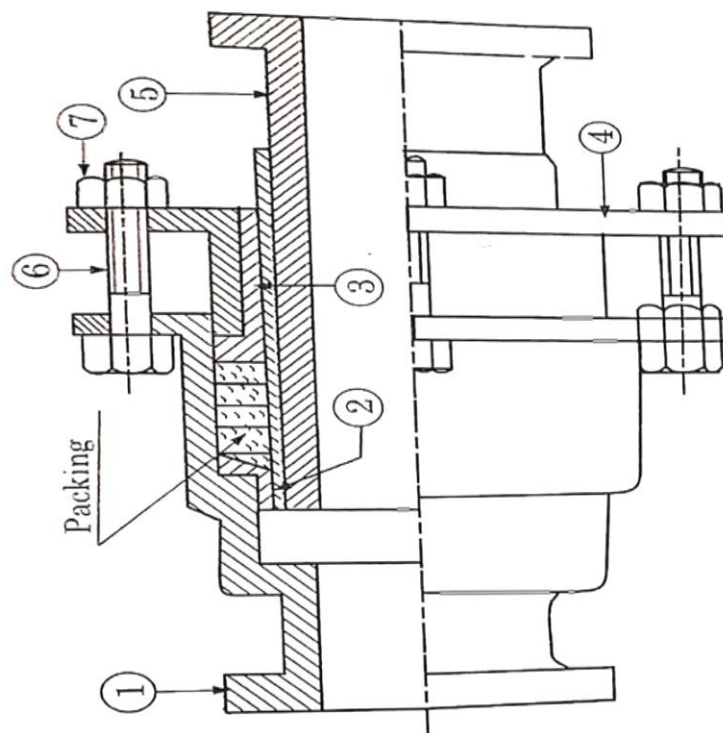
(a) : Detail Drawing of Expansion Pipe Joint
